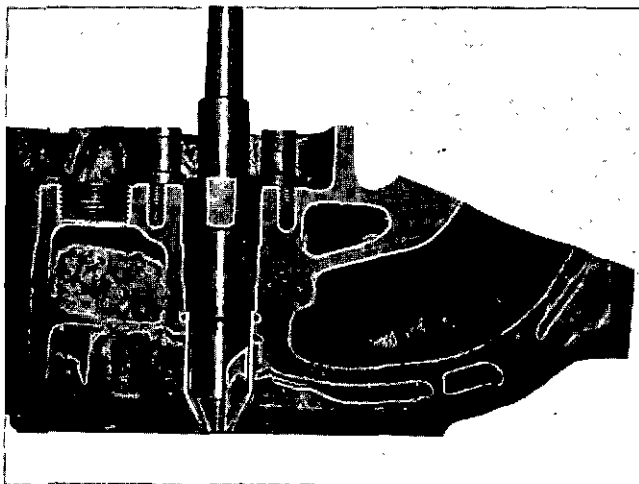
, V40229. Cut injector seat with ST-884
